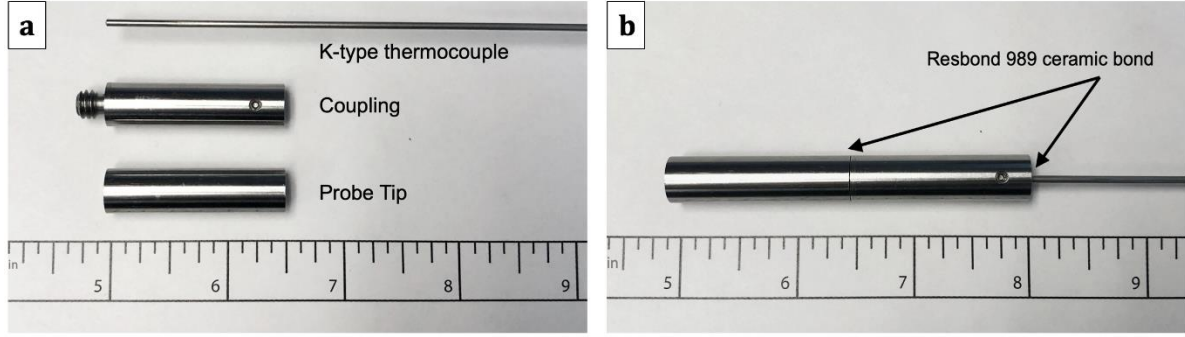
Fabricated CHTE quench probe by CNC lathe (a), assembled probe (b).
